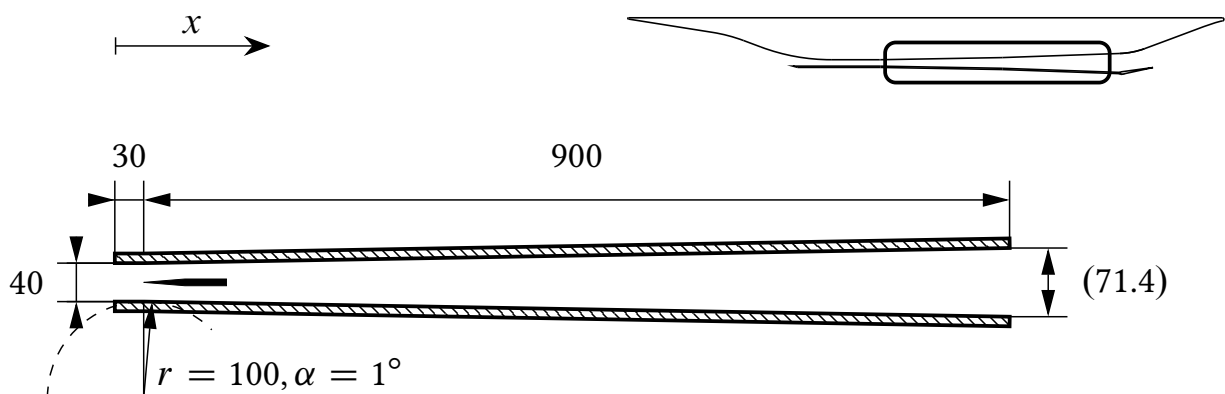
General dimensions of the combustion chamber, dimensions in mm.
